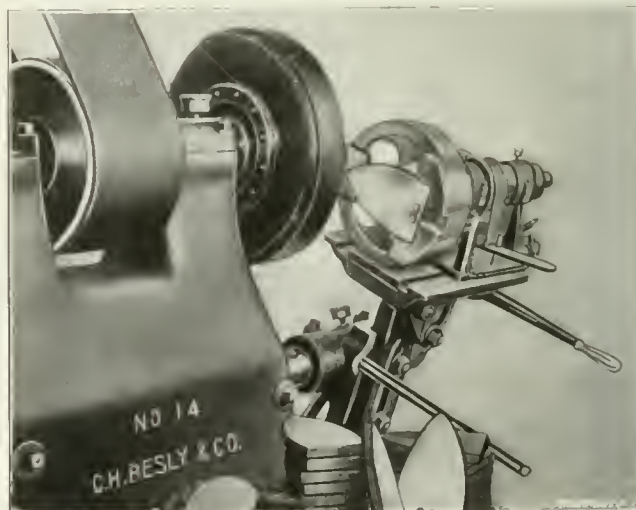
Grinding Cast-iron Sad-iron Bottoms; Stock Removed, 1/16-inch; Rate, 100 Surfaces per Hour
